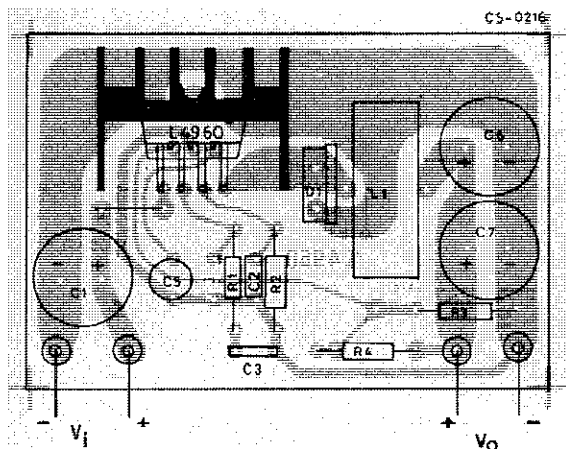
P.C. board and component layout of the Fig. 24 (1 : 1 scale)
